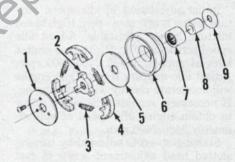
Exploded view of clutch used on DM-50 Multi-Purpose Saw.
